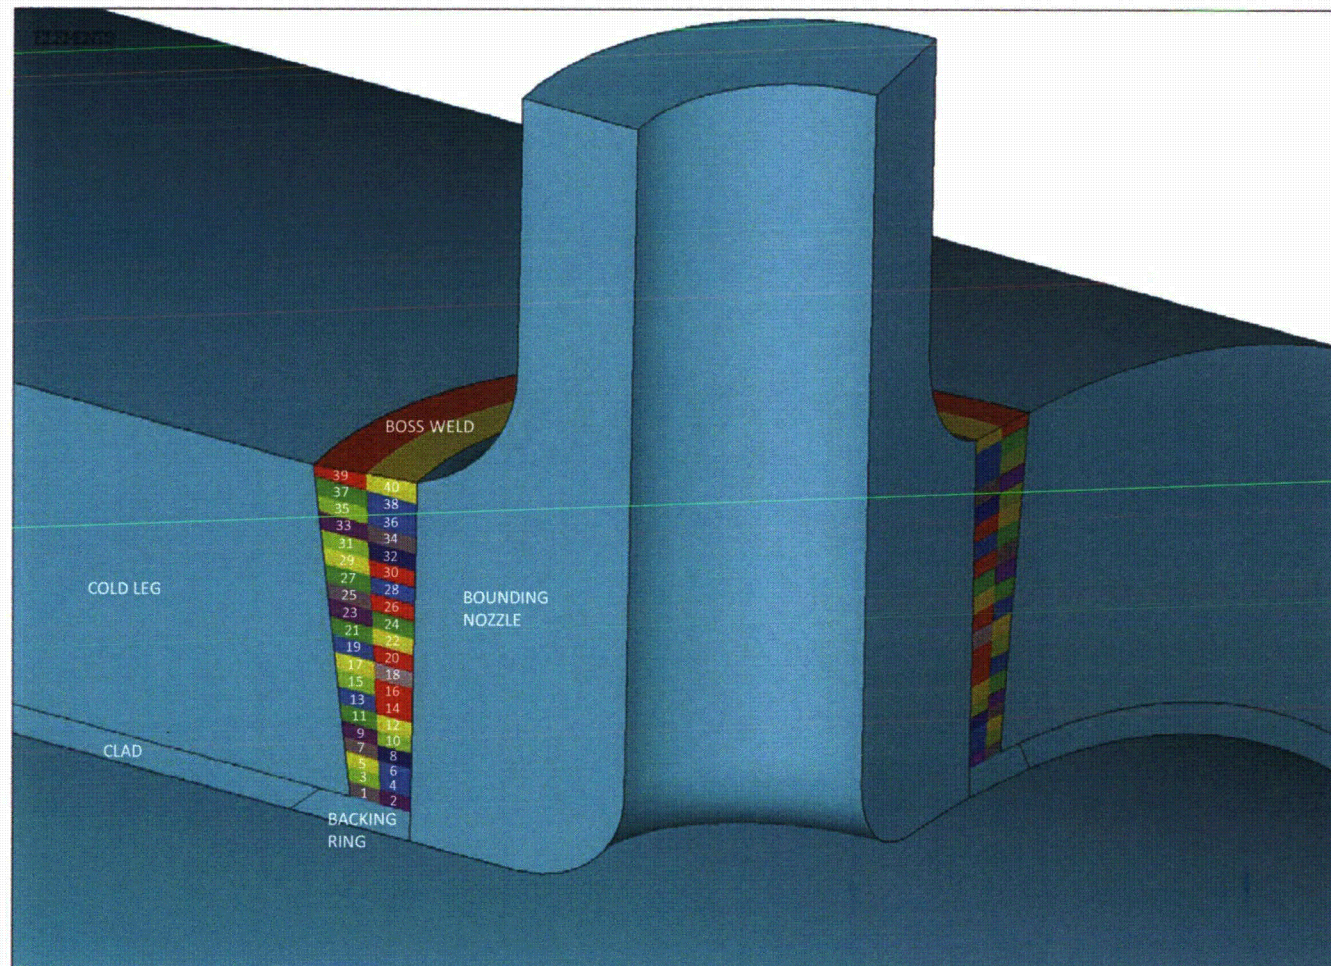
Weld Nugget Definitions for the Bounding Cold Leg Nozzle Boss Weld
